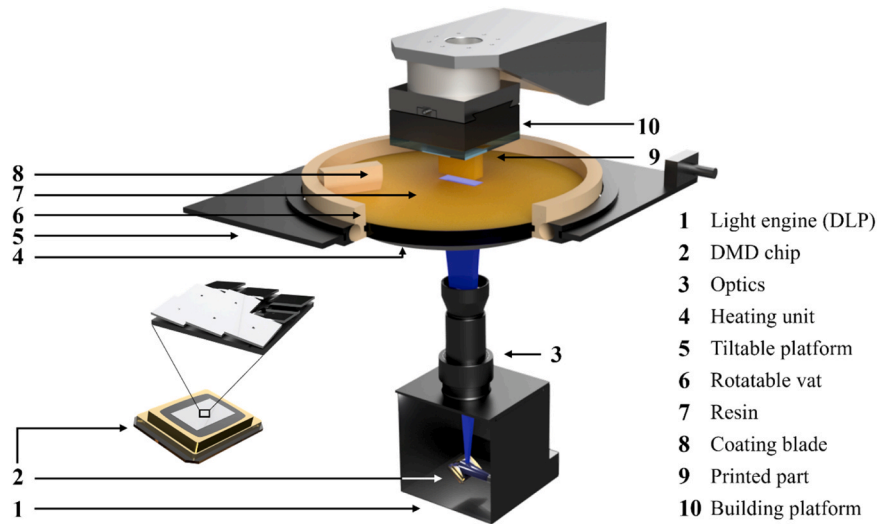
Schematic setup of the used 3D printing system developed by TU Wien.
